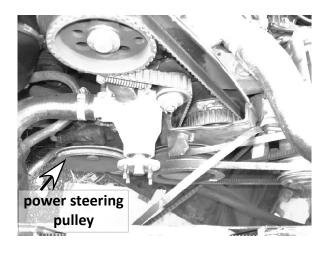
Upper timing belt cover removed. Note waterpump/power steering belt hanging over the alternator and air conditioning compressor belts. (Arrow shows power steering pulley.)
